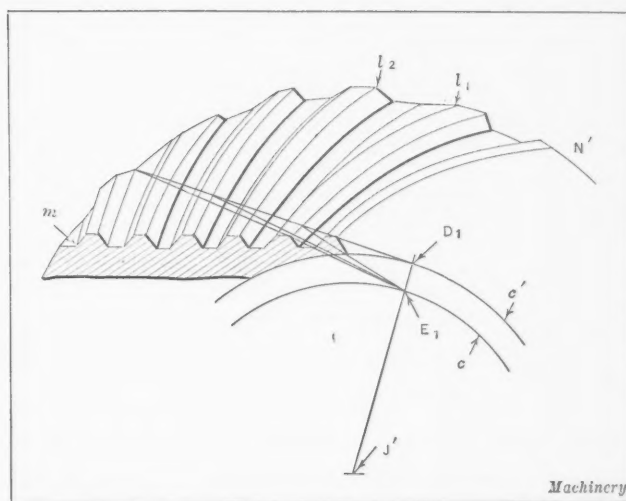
Portion of a Spiral Bevel Gear of the Extended Involute Type
